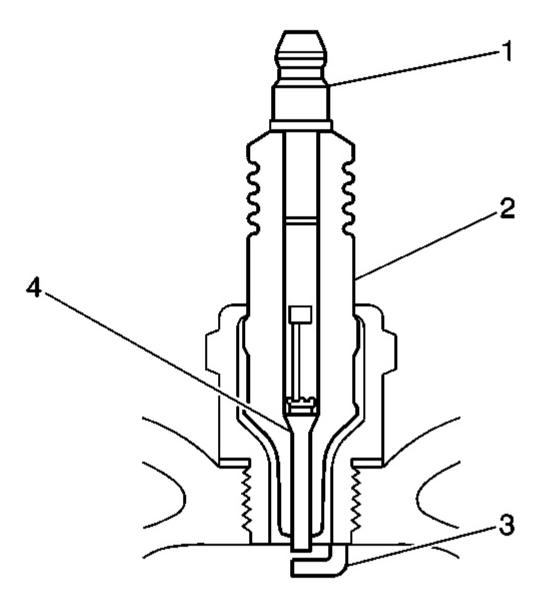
Inspecting Spark Plug Components Courtesy of GENERAL MOTORS CORP.
